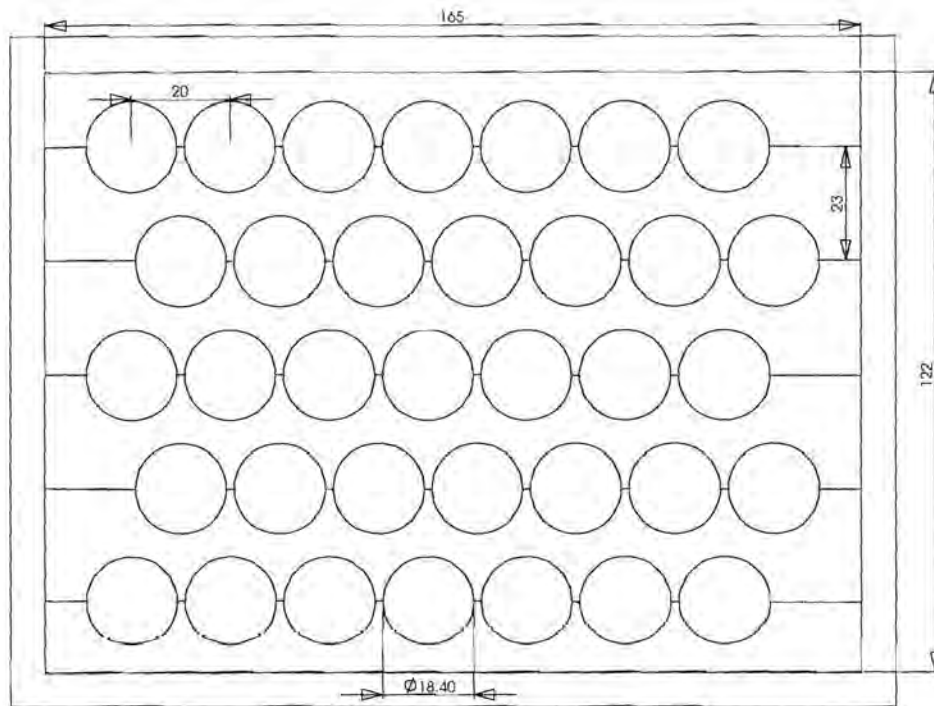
b Top view of a manifold with some relevant dimensions in mm.
